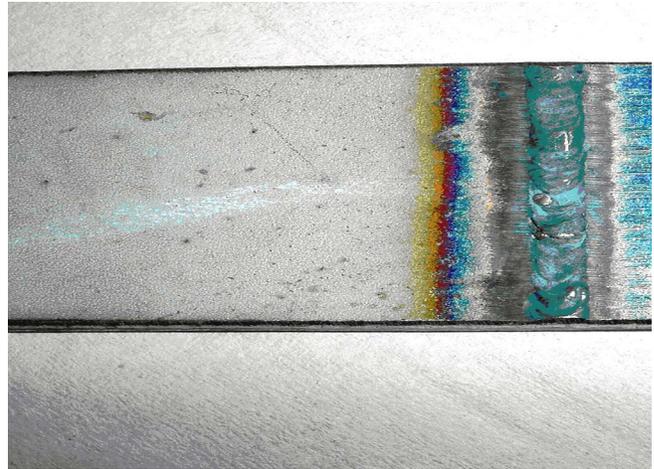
Heat tints (weld discolouration) on the root of a stainless steel butt weld (TIG/GTAW with argon gas purging) of 3 mm thick UNS S31603 (steel number 1.4404, Type 316L) pipe (300 mm ID).
